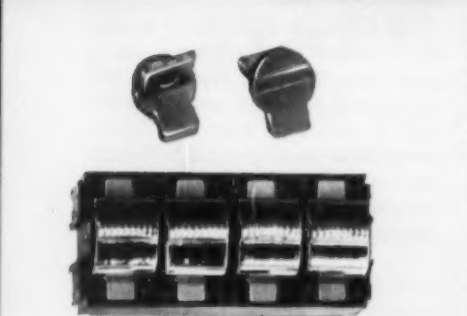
(right)—Typical Teflon moldings for use as connector inserts and spacers. In each case, moldings give a level of quality not obtainable with machined parts
